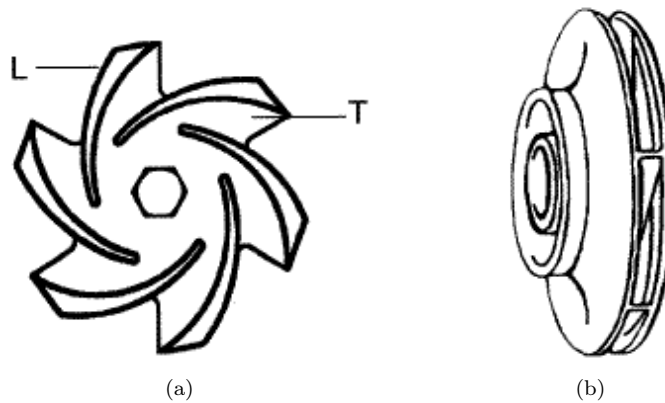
An open impeller (a) and a closed impeller (b) [21].
